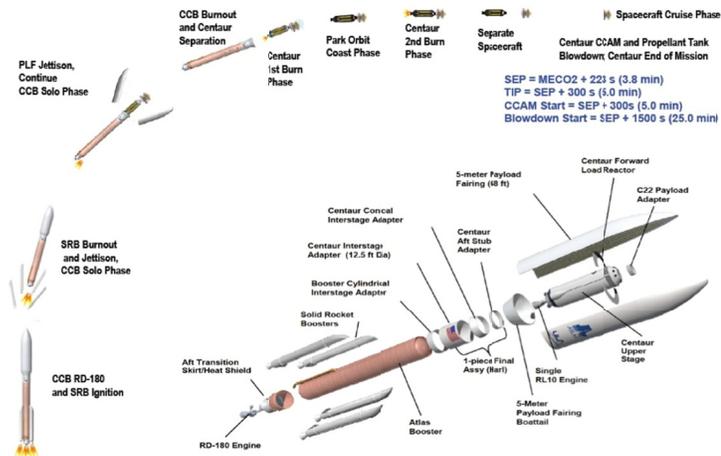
Atlas V 541 Ascent Profile and Exploded View
